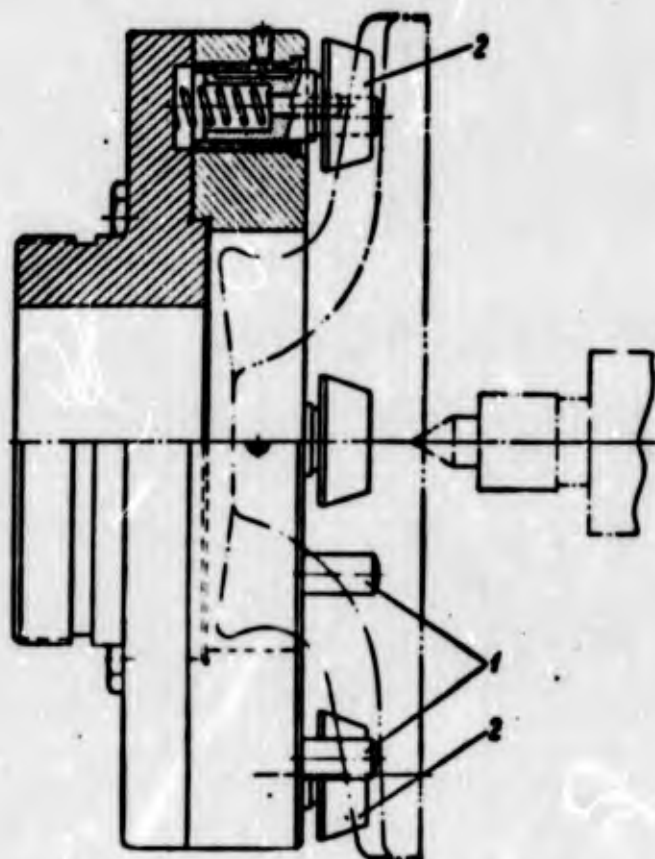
Turning of external surface of impeller with installation of blank on floating bevels.
